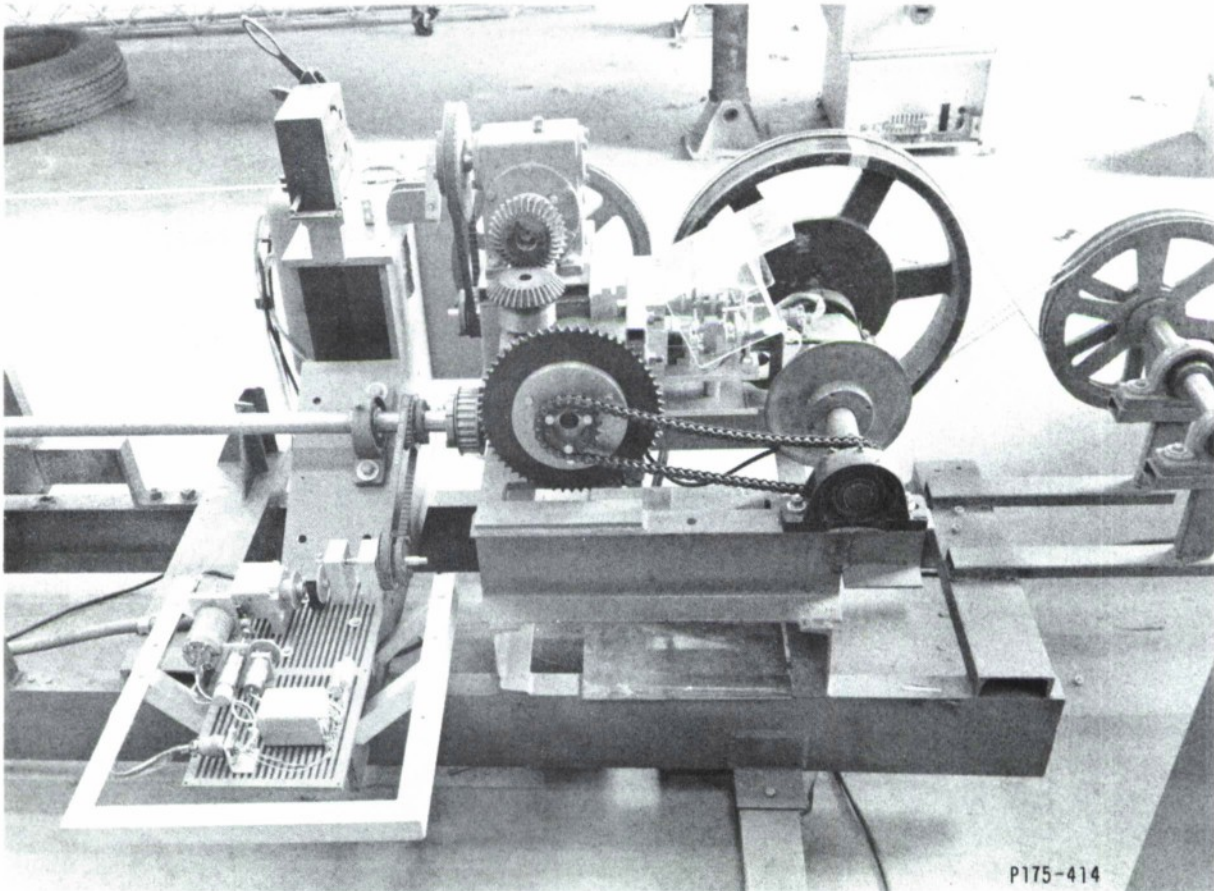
Rear view of tapping machine showing some of the servo components on the mounting plate (near left).
